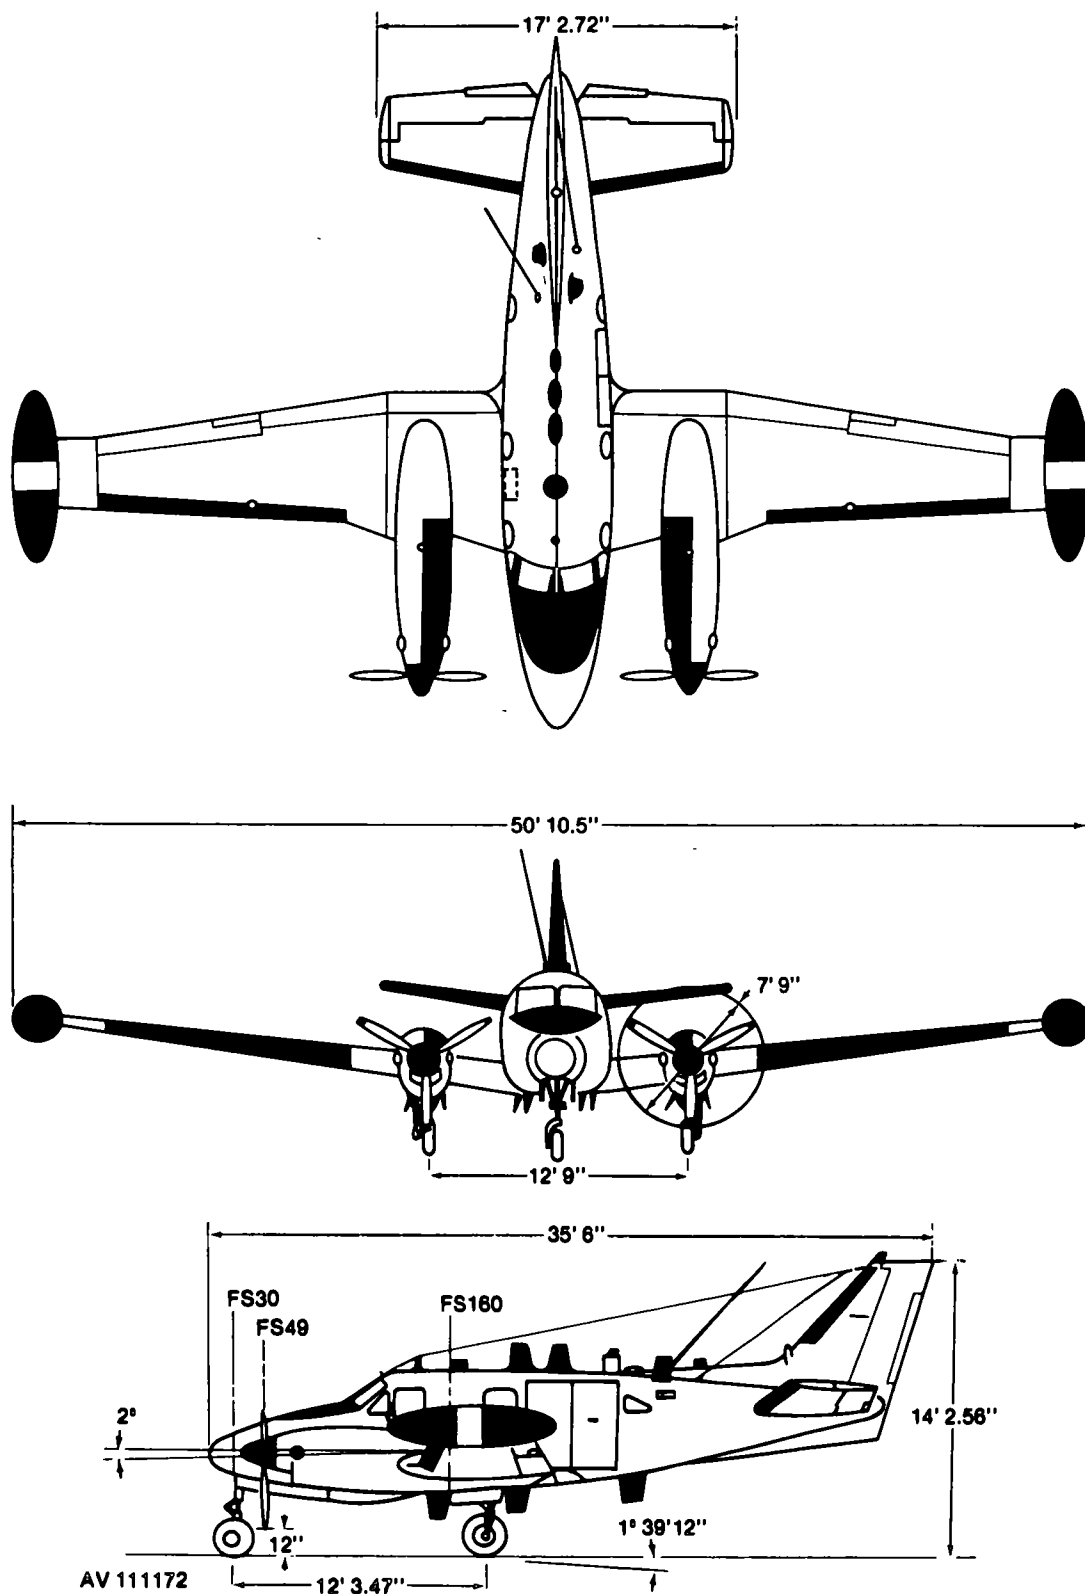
Three View Drawing and Dimensions (RU-21A)
